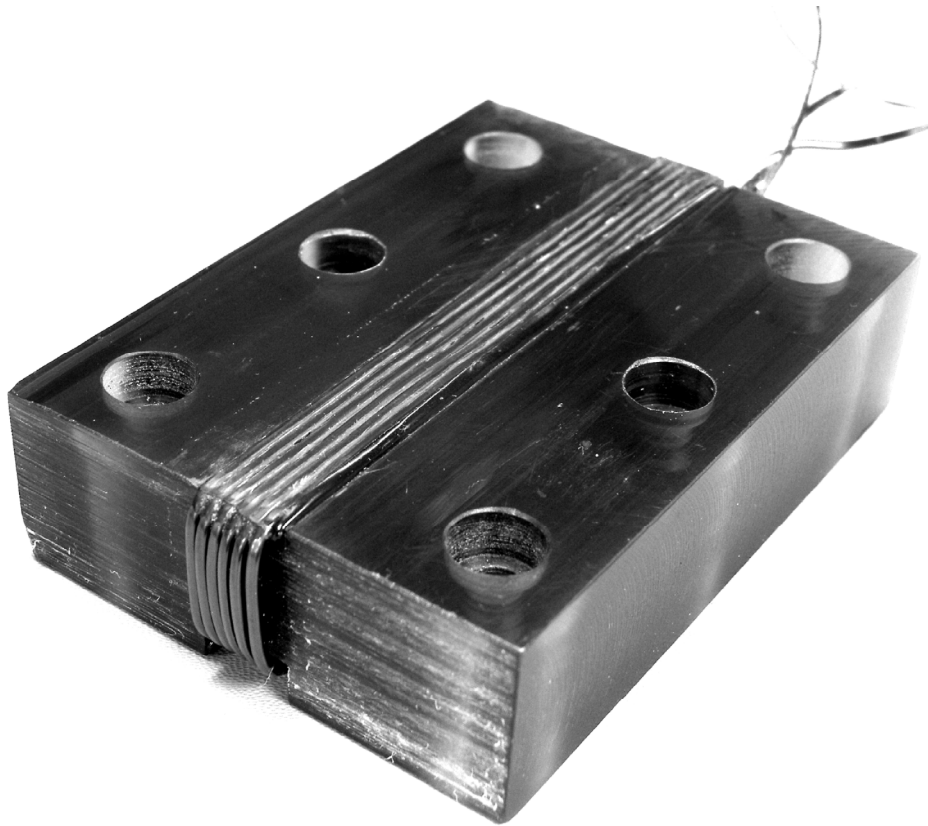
Radial Halbach magnetic bearing test model r-z stator pole piece.
